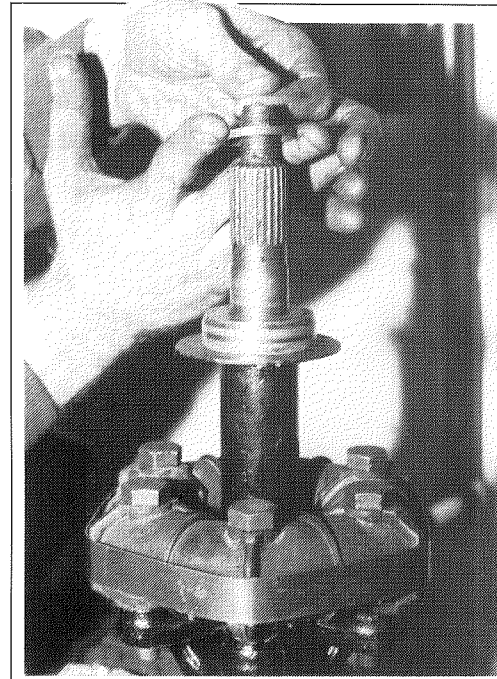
Returning to the drive shaft, slide over the inner thick spacer followed by the required number of thin shims.
